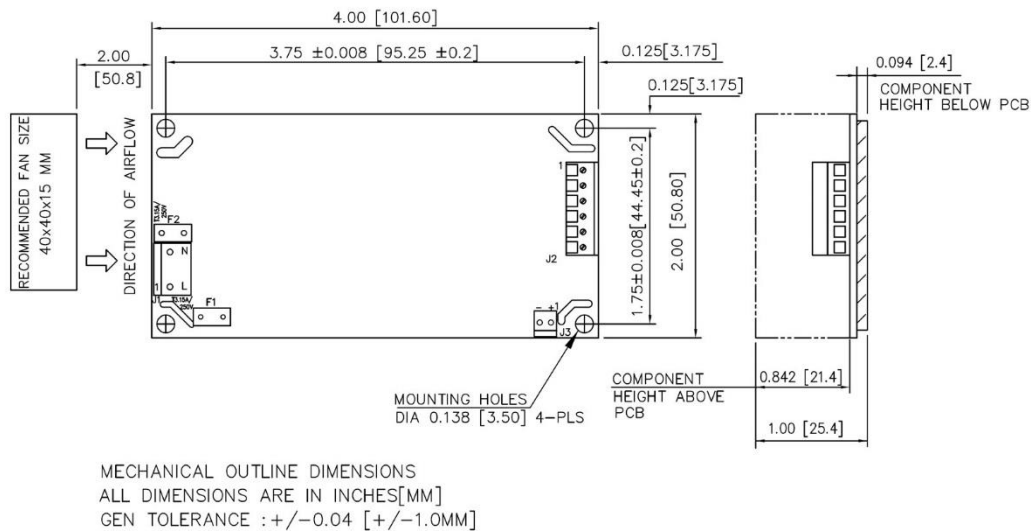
Mechanical Drawing – Screw Terminal (Option 1)
